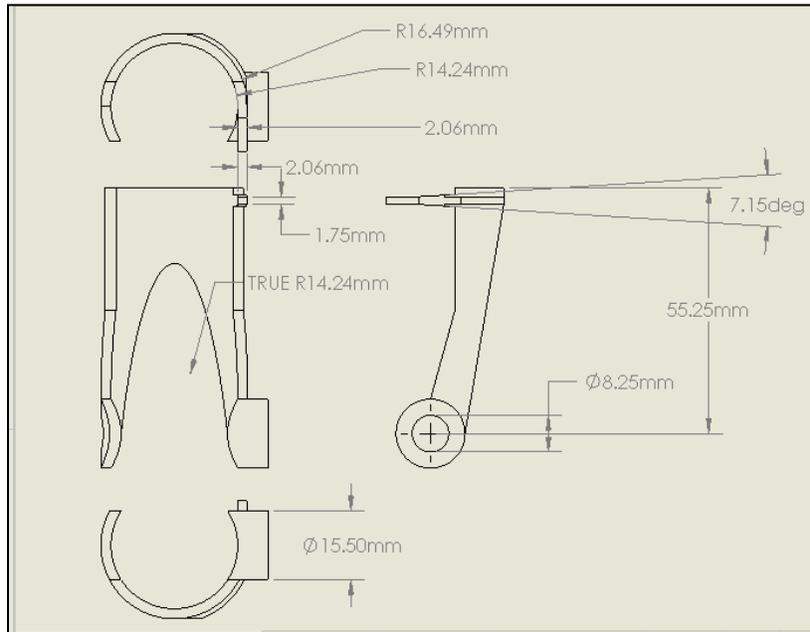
Infrared sensor holder CAD and dimensions (mm).
